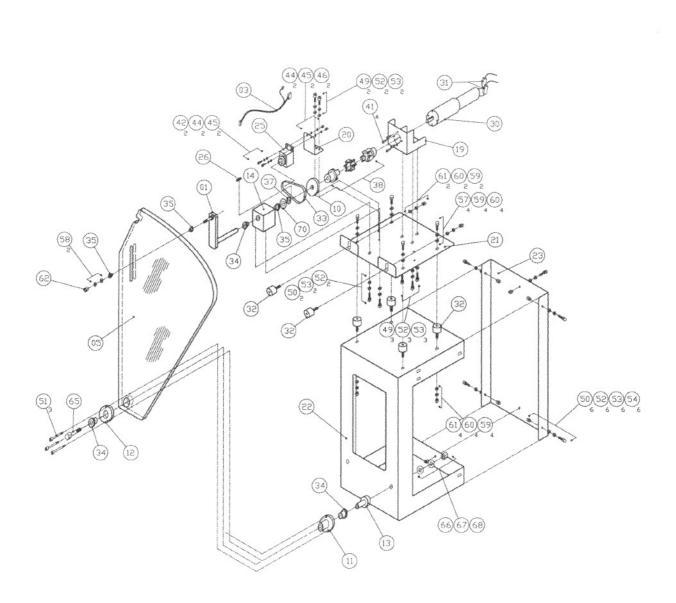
Exploded View Bi-parting Drive Assembly
